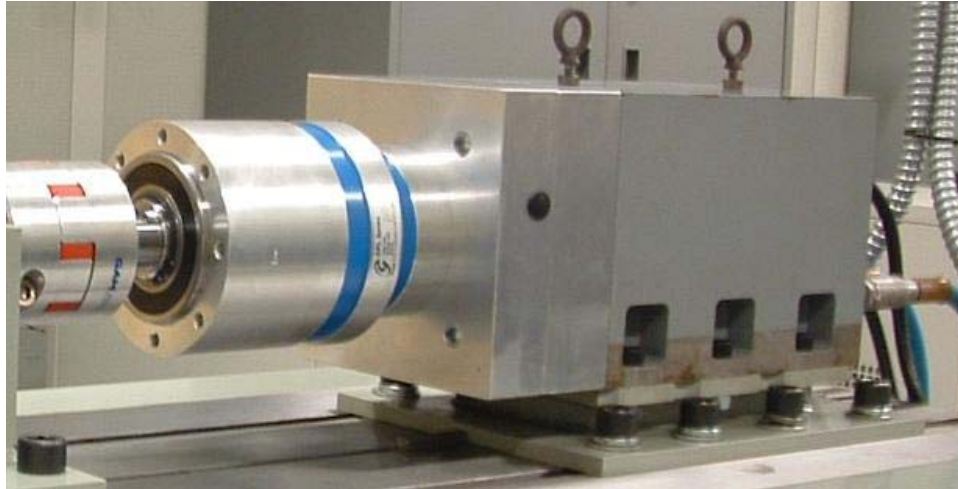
Drive system comprised of (left to right) coupling , gear reducer, and motor
